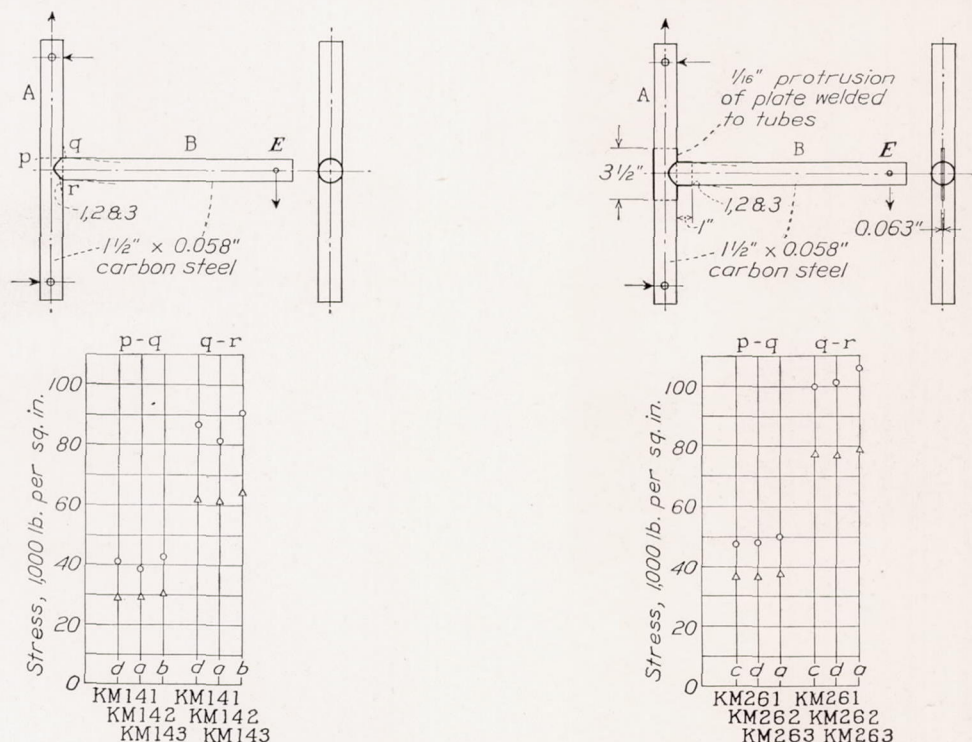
Results of the cantilever test of T joints made with carbon steel and low-carbon welds.
